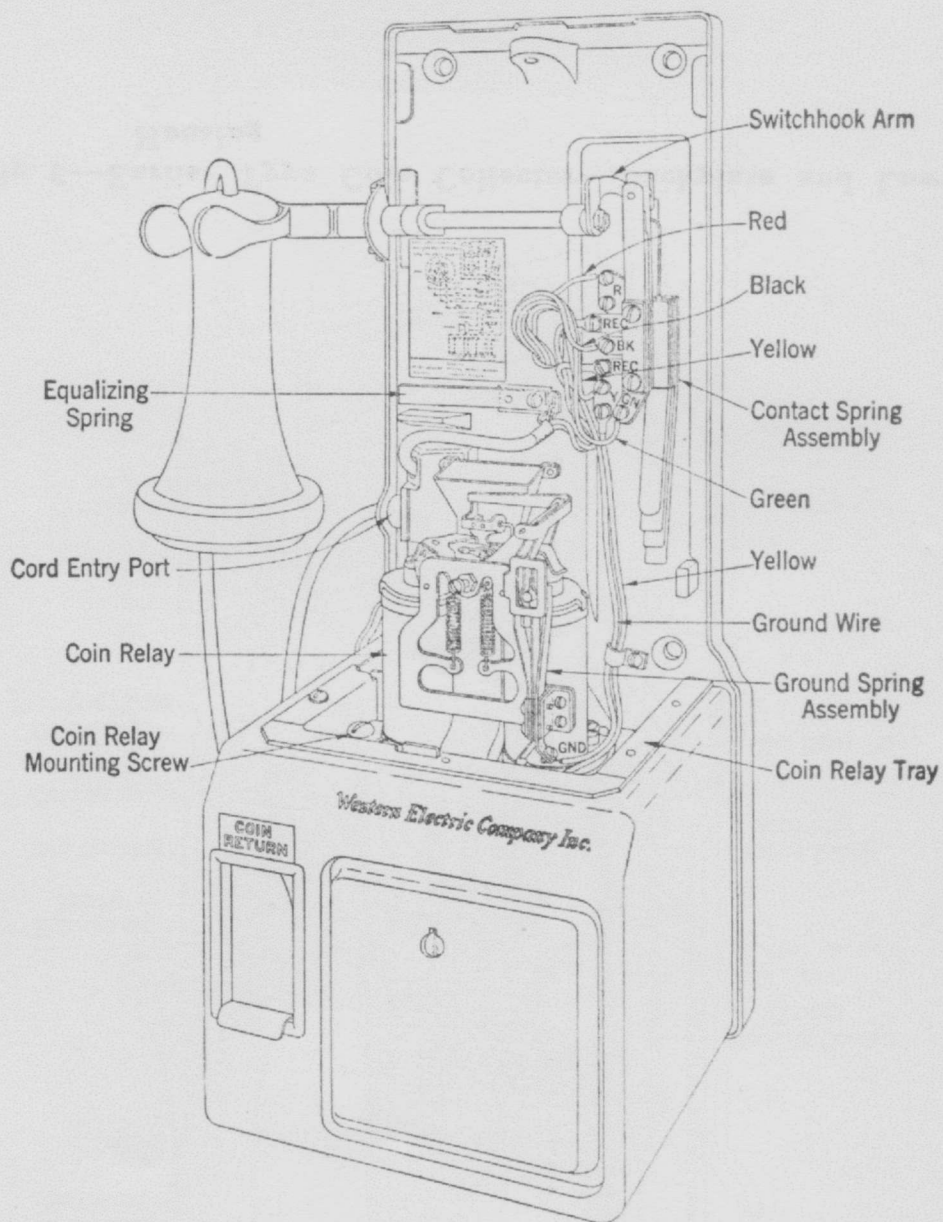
Earlier Type Coin Collector—Backplate and Lower Housing
